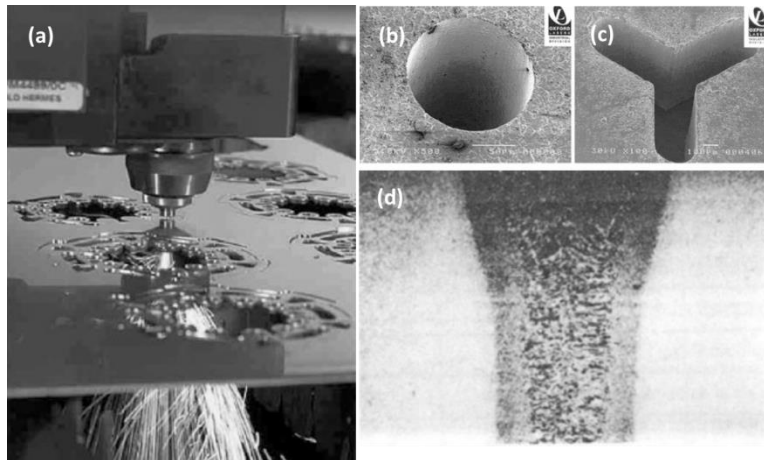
Examples of showing high power CW-laser used in the material processing: (a) laser-cutting, (b) laser-drilling; (c) laser-piercing and (d) laser-welding [12].
